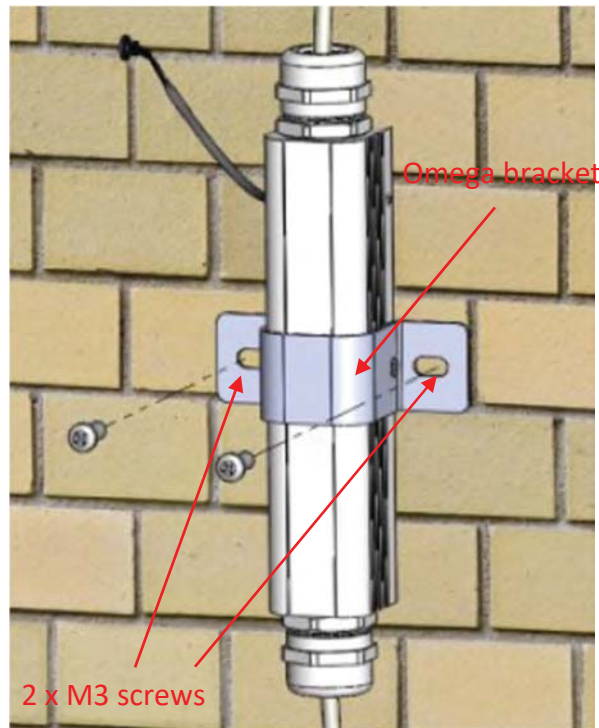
Outdoor Ethernet Surge protection – wall mounting
